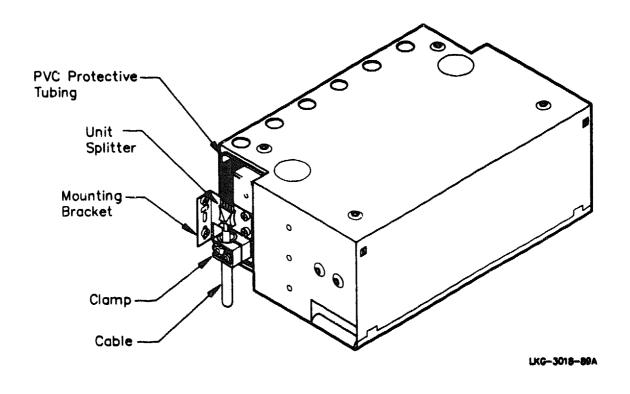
Outdoor Cable Installation (Bottom Entry)
